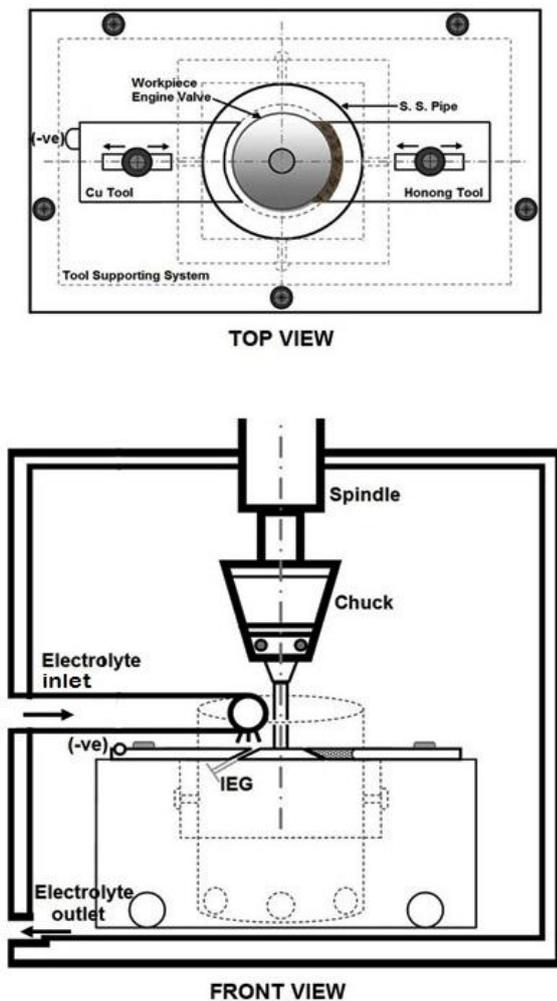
A schematic diagram of machining chamber with tools and positioning systems in ECH of valve face
